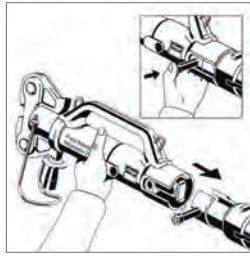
Place the Press Booster in the press machine and lock in using the retaining bolt.
